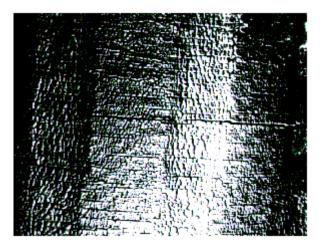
The aspect of the caliber surface of a rough rolling cylinder with nuances of circular cracks and longitudinal cracks
